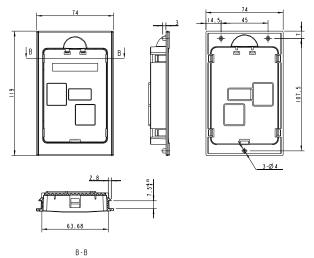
Outline dimensions of operation panel box The mounting dimensions of the operation panel box is as shown in Fig. 1-4.
